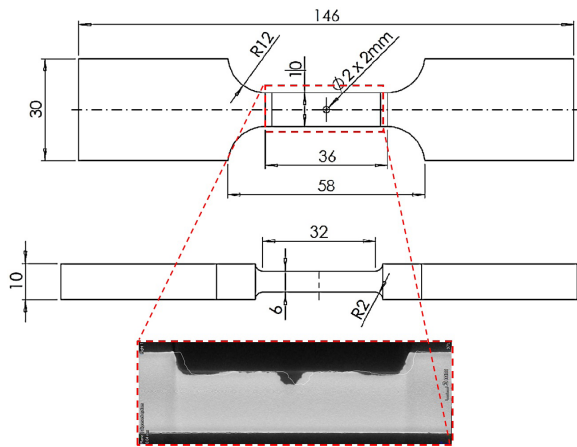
Fatigue test specimen with casting skin and complex artificial surface defect, CT image of the cross-section of the gauge length
